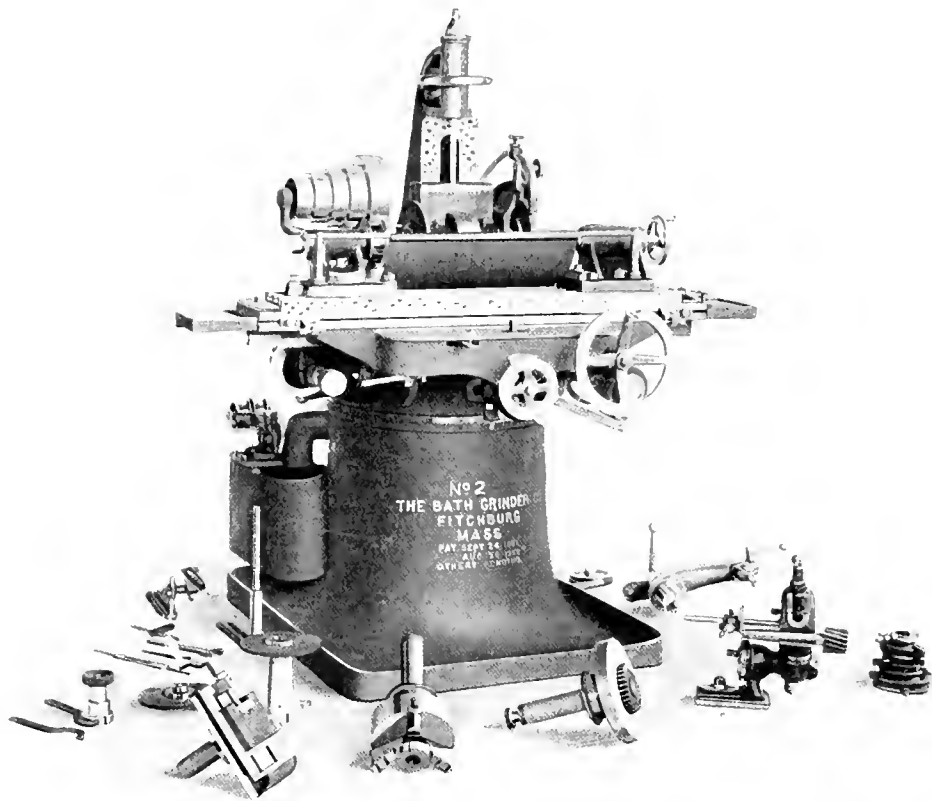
Bath Grinder. Front View, showing Fixtures.
